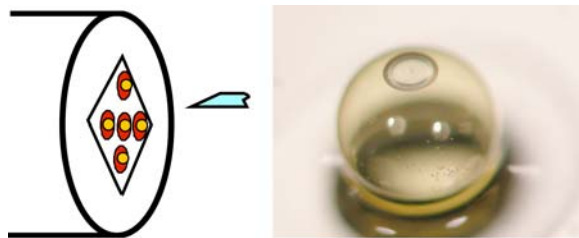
GDP/PVA/PAMS shells were held in place with hardened Aunt Jemima® syrup on a coverslip (held in turn by vacuum on a lathe). After centering one shell at a time on the lathe’s axis of rotation, a diamond tipped machining tool cut a 250 μm hole in each shell.
